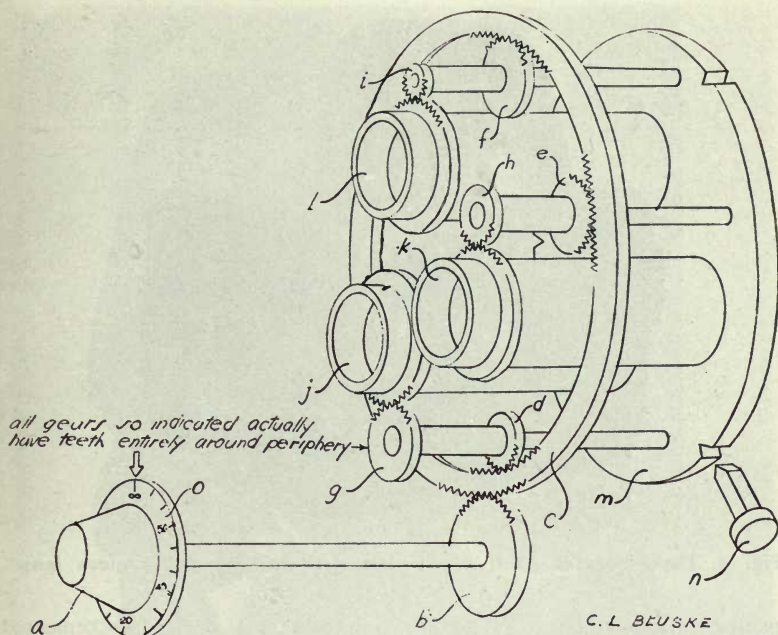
Schematic drawing of basic principle of planetary gear system.
